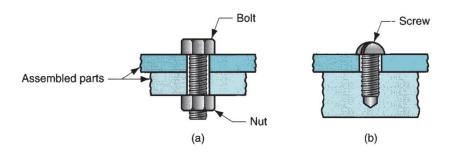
Mechanical fasteners - assemblies using bolt and nut (a), and screw (b) [11]
